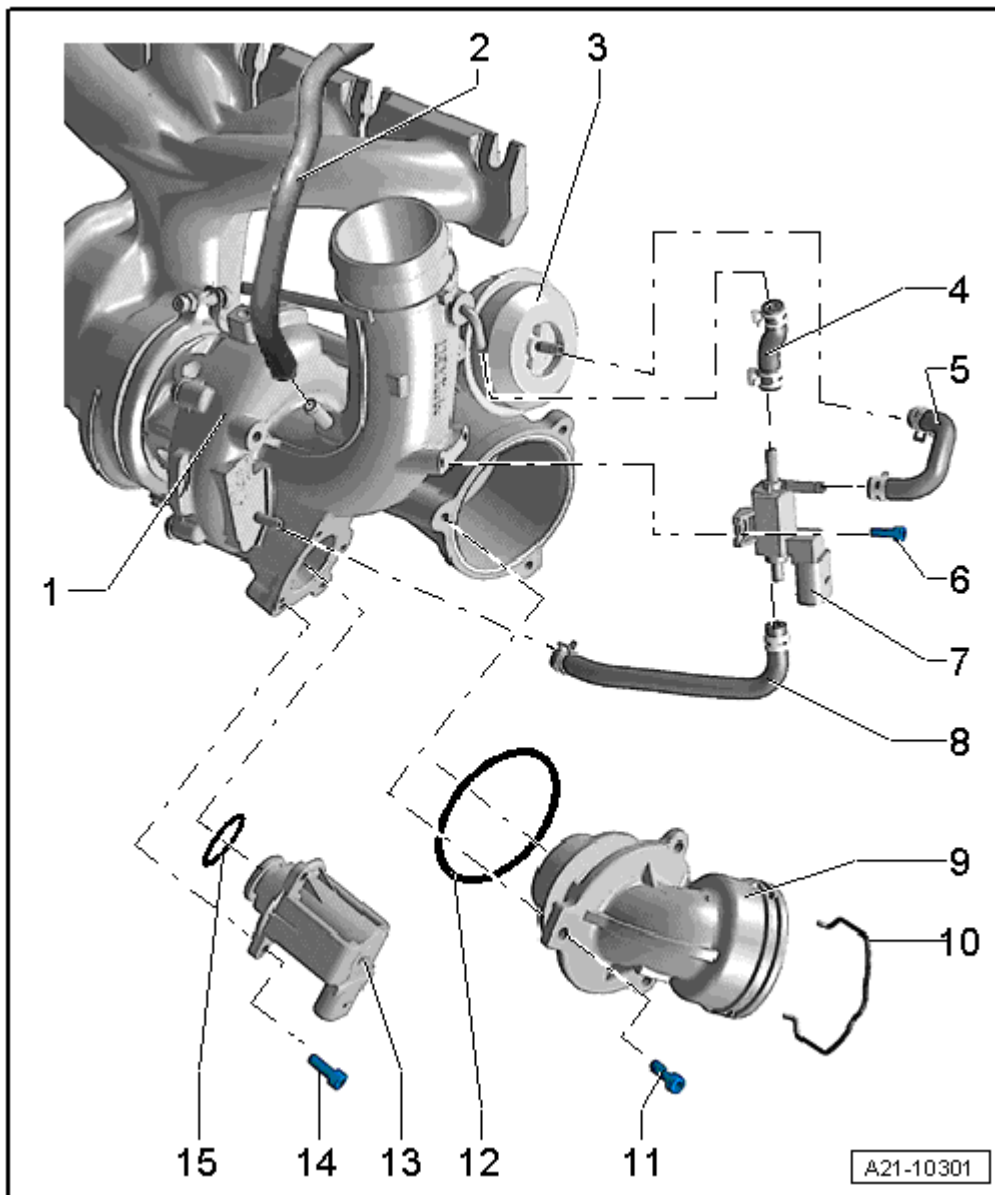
Identifying Assembly Overview: Turbocharger - Part I
